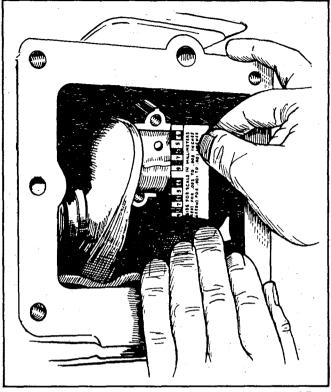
MEASURING BEARING CLEARANCE WITH PLASTIGAUGE
